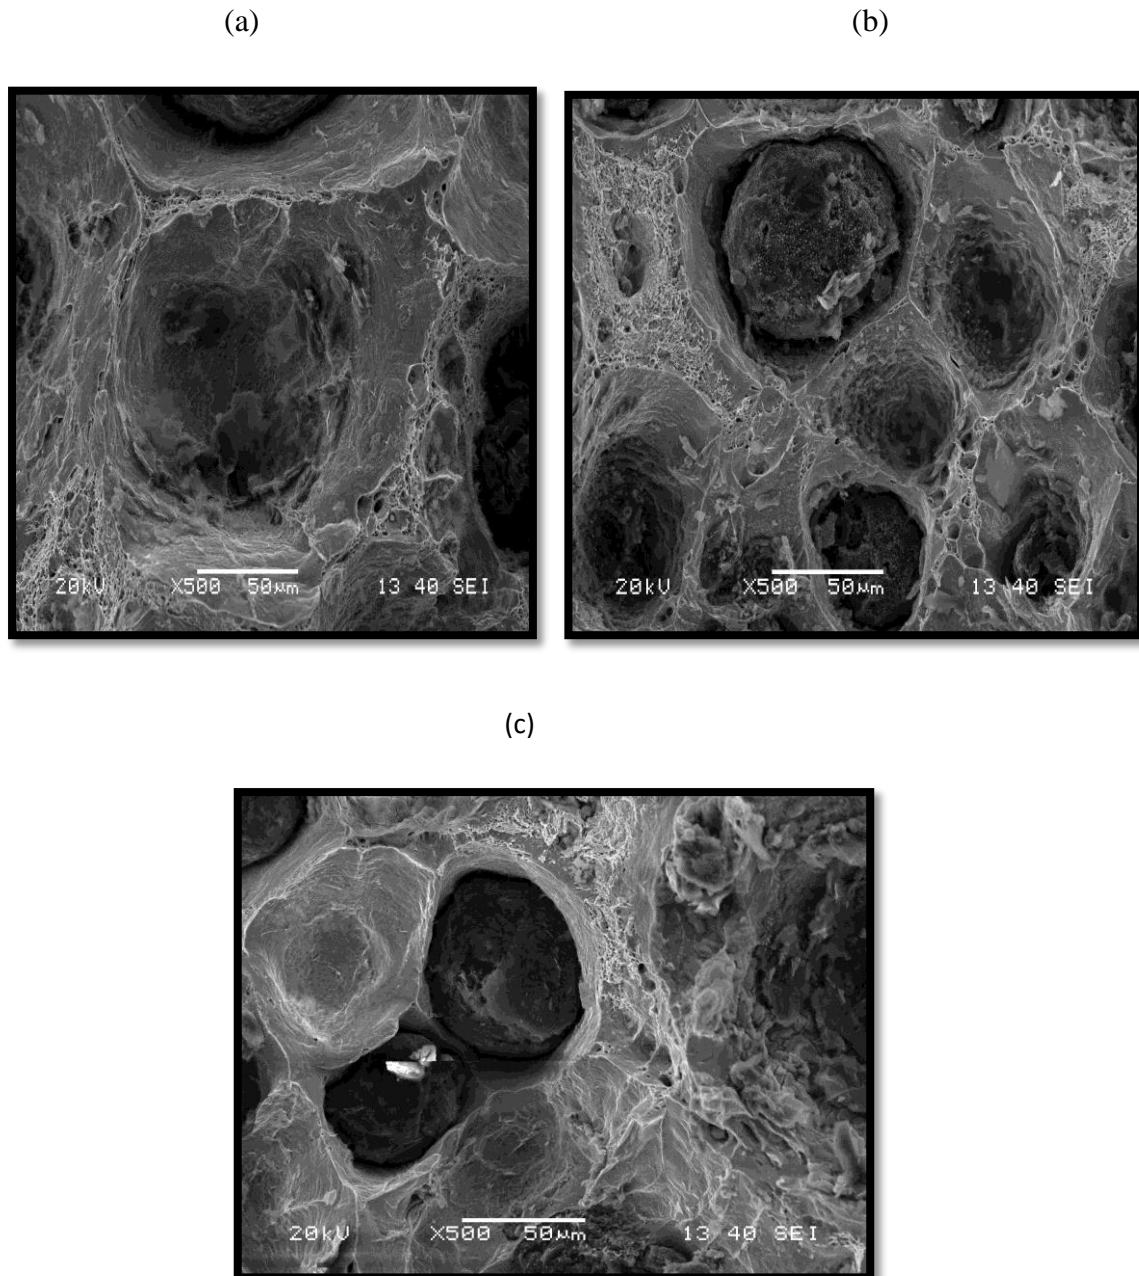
Fracture Surface of DMS ductile iron samples after tensile testing.
